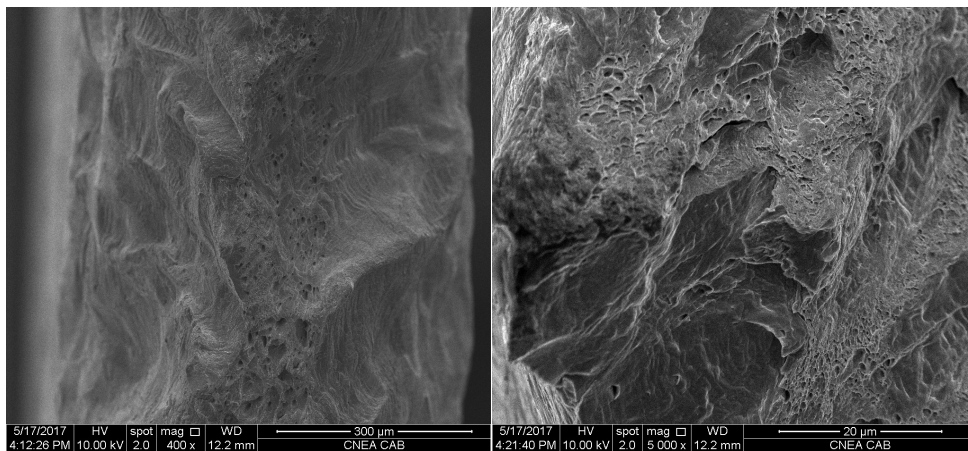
Fracture surface of Specimen #3 with 400 and 5000 zoom.
